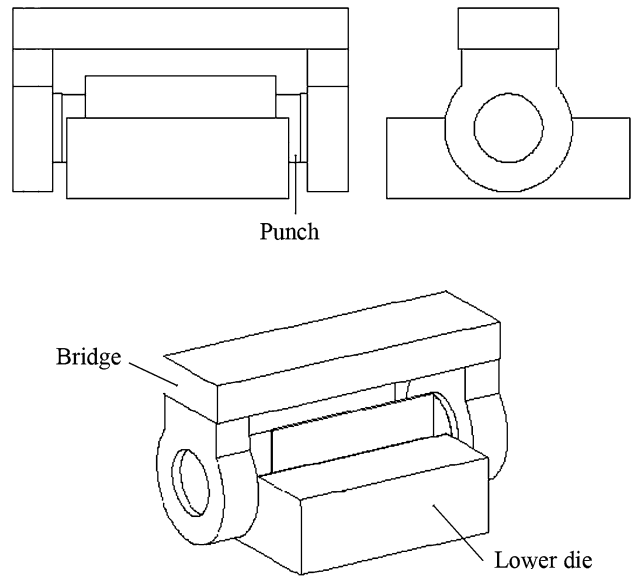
Assembly plane of the device to manufacture coupling prototypes on the laboratory scale
